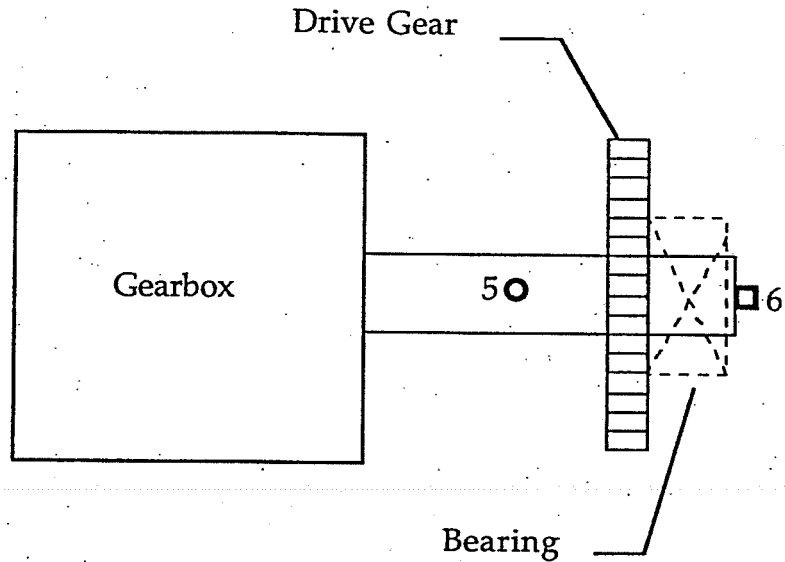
Schematic Layout of AE Sensors on the Drive Shaft
